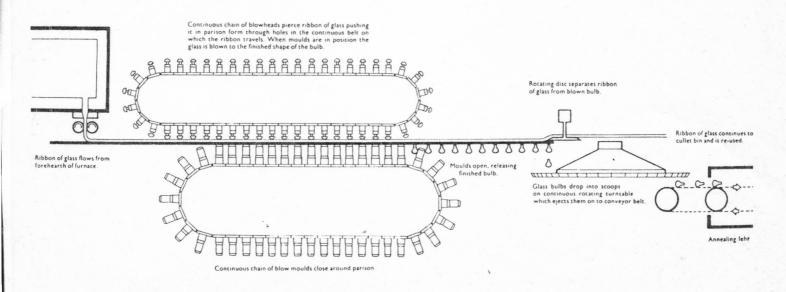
The ribbon machine for the automatic production of light bulbs. One of these machines can make over 2000 bulbs a minute.
